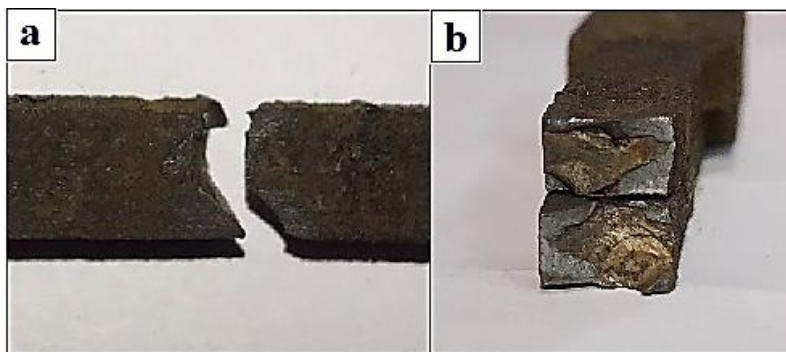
Fracture of one of the A2 tensile test specimens (a): fracture mode (b): cross-section of fracture.
